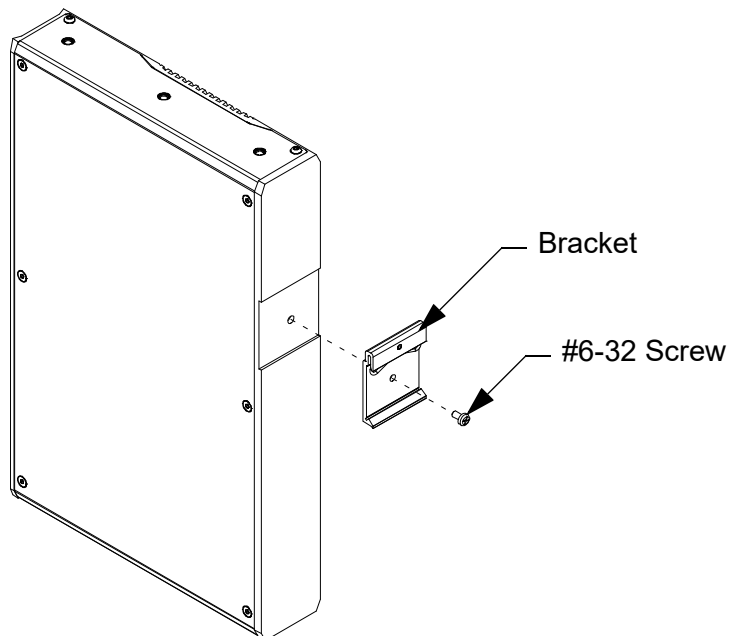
NC-S Node Controller DIN Rail Mounting
